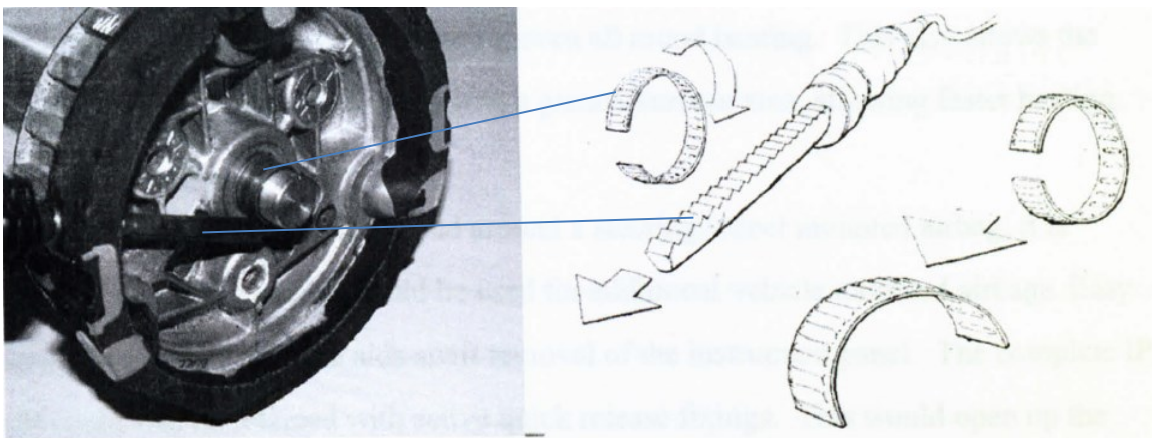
Hot probe A.Dis. technique for steering wheel airbag. Source: (Jones,2003)
